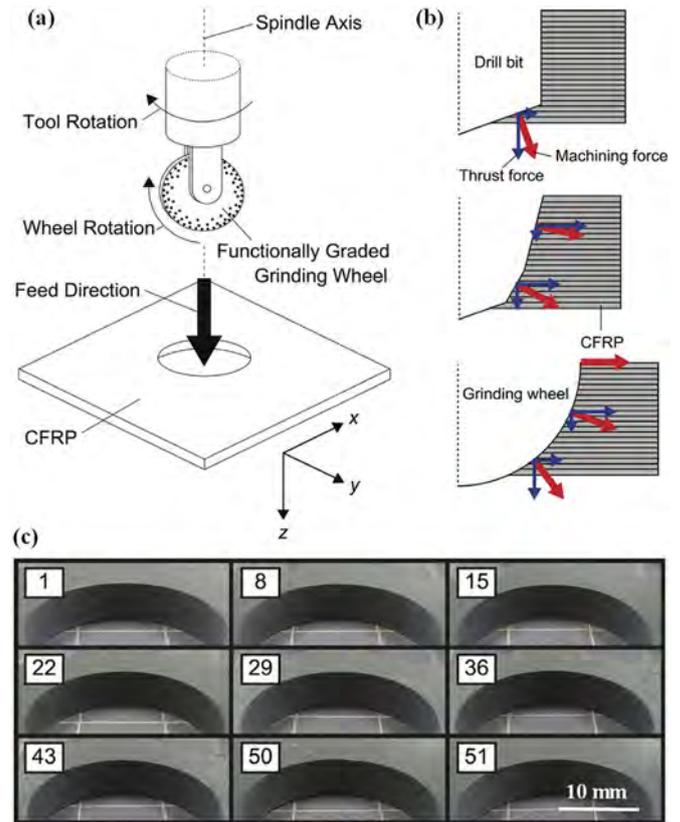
Drilling CFRP by DAGWS [75]: (a) schematic diagram of DAGWS; (b) schematic diagram of reducing exit damage by DAGWS; (c) photographic views of the holes drilled by DAGWS.
